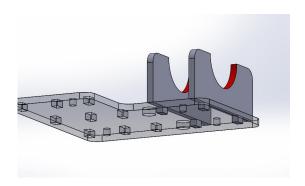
A view of the underside of an incomplete gearbox showing the tooth and slot method for uprights.
